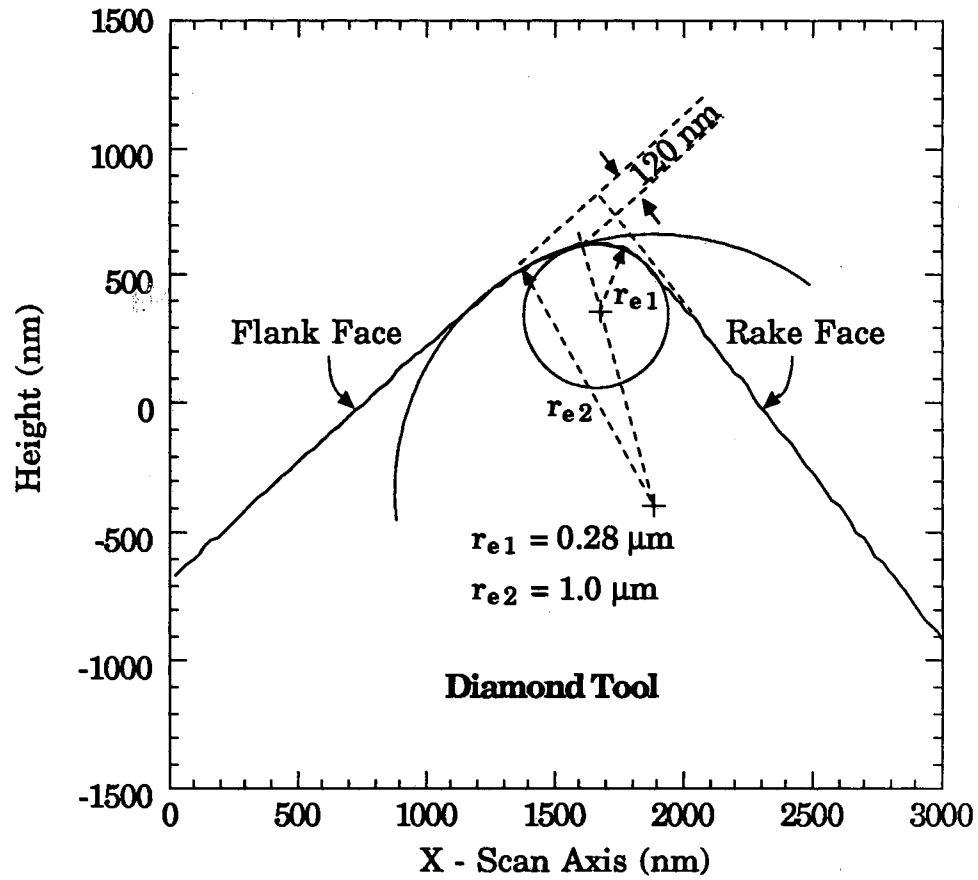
Measured Tool Edge Profile Using AFM for 0° Rake Angle Worn Tool (Tool A4)
